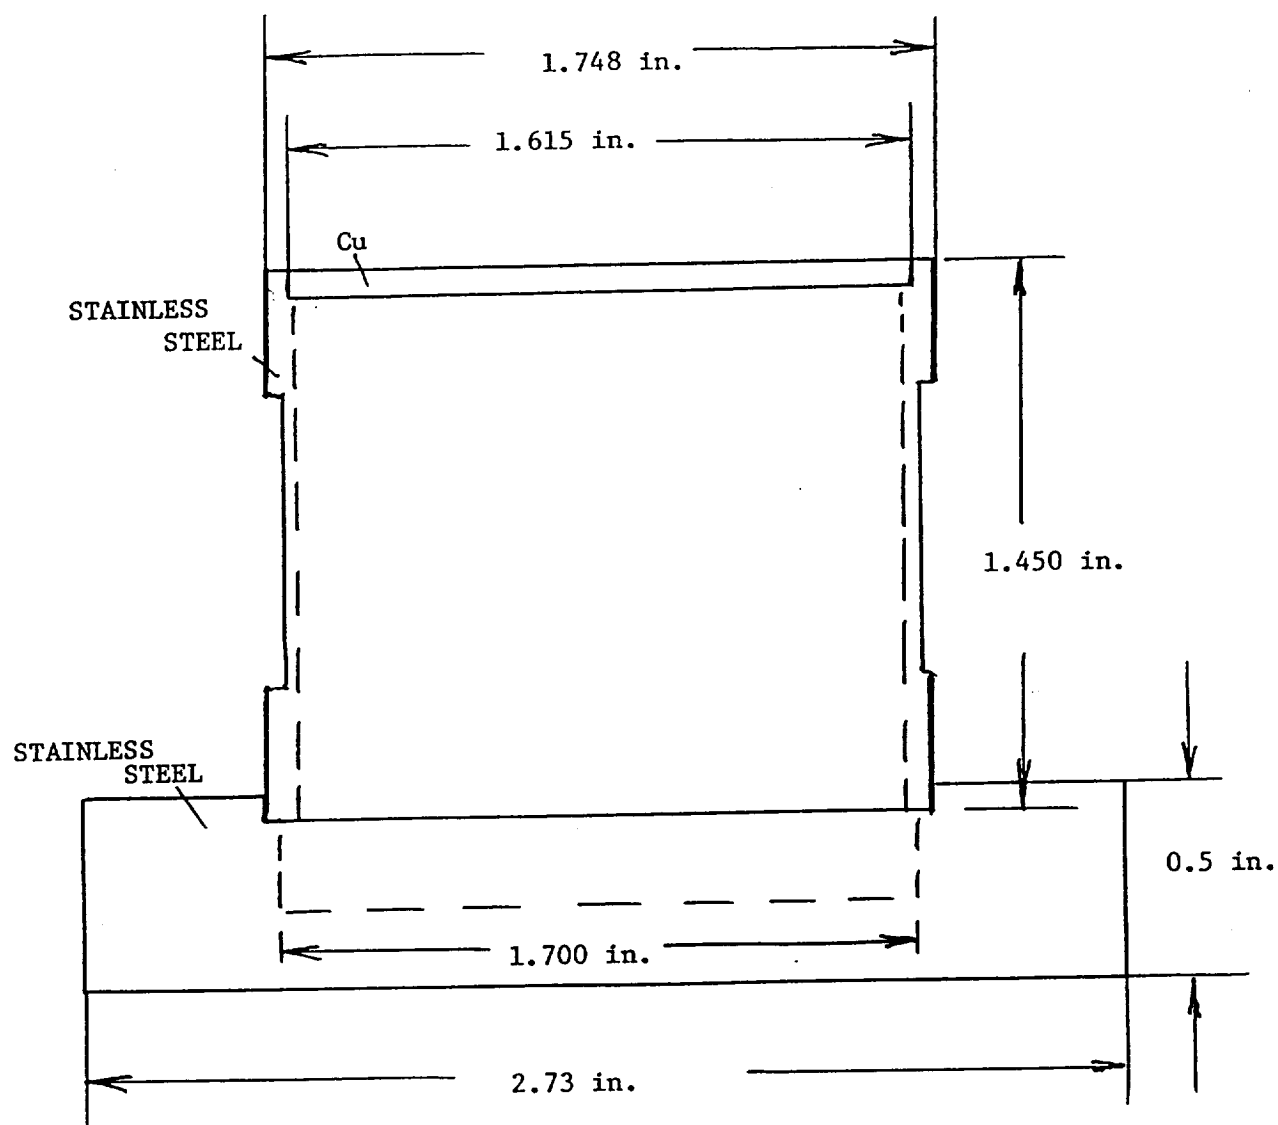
Top section of the apparatus for He II_p near and above atmospheric pressure : pressure chamber with top Cu-plate and standard flange for Cu-gasket serving as seal between He II_p and vacuum .
